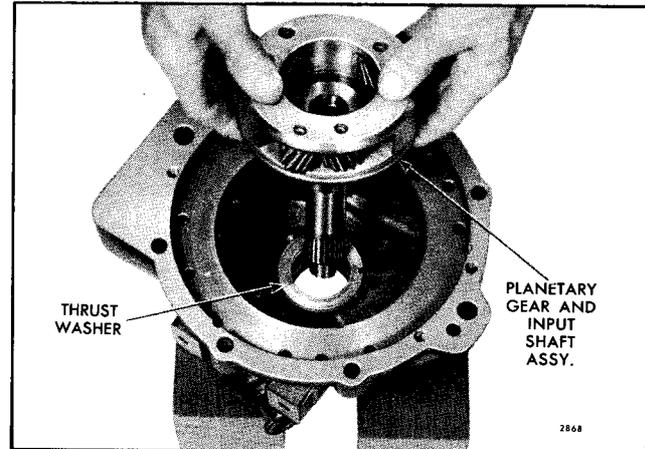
Installing Planetary Gear and Reduction Gear Input Shaft Assembly in Gear Housing (1.5:1 and 2.1:1 Ratios)
